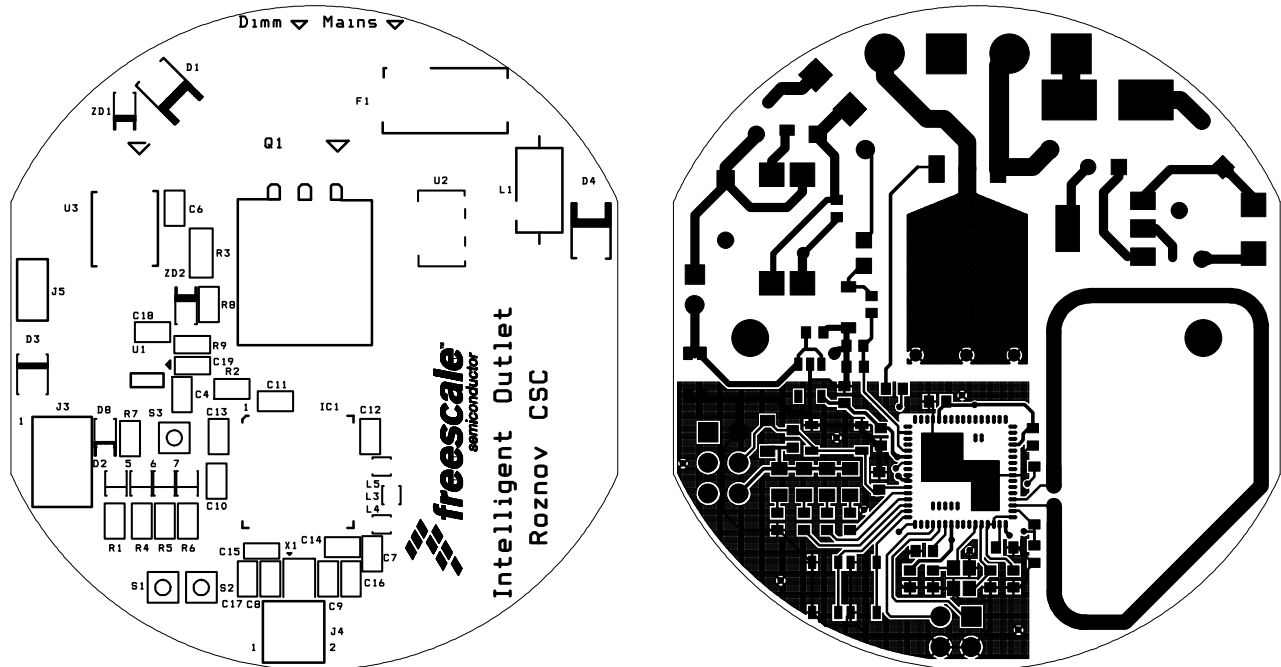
Intelligent Outlet Version 1, Parts Placement and PCB Layout, Top Side
